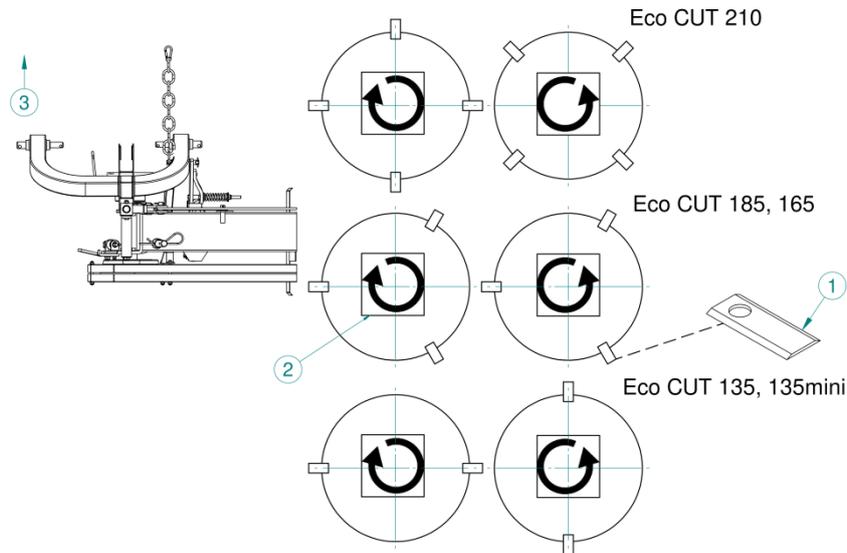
Diagram of the proper mounting of holders and blades on the working discs: 1) Cutting blade, 2) Direction of cutting discs rotation, 3) Direction of mowing
